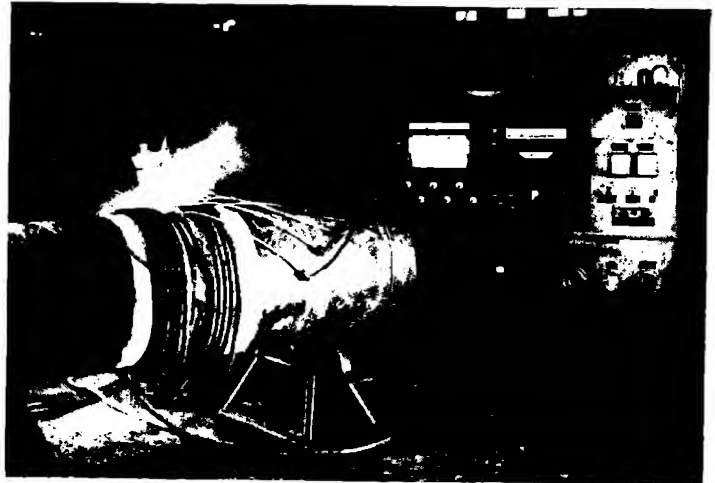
Preheat imparted by continuous furnaces is maintained by means of gas torches and asbestos blankets
